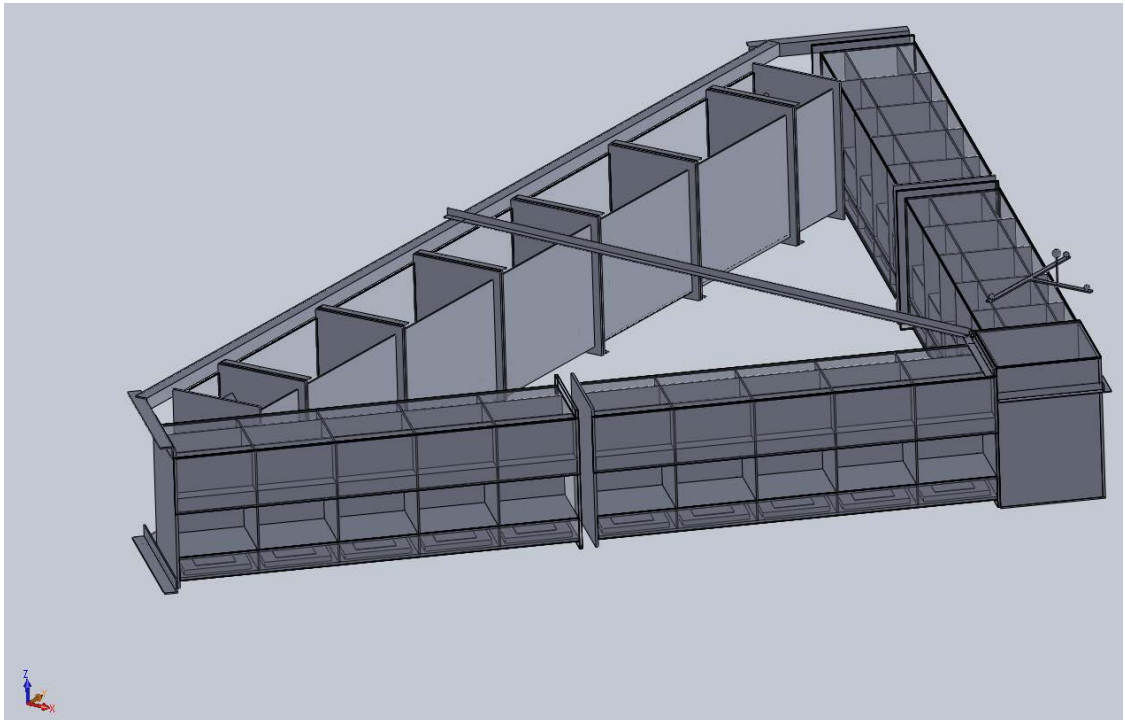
3D Drawing of the Delta OWC Array Model
